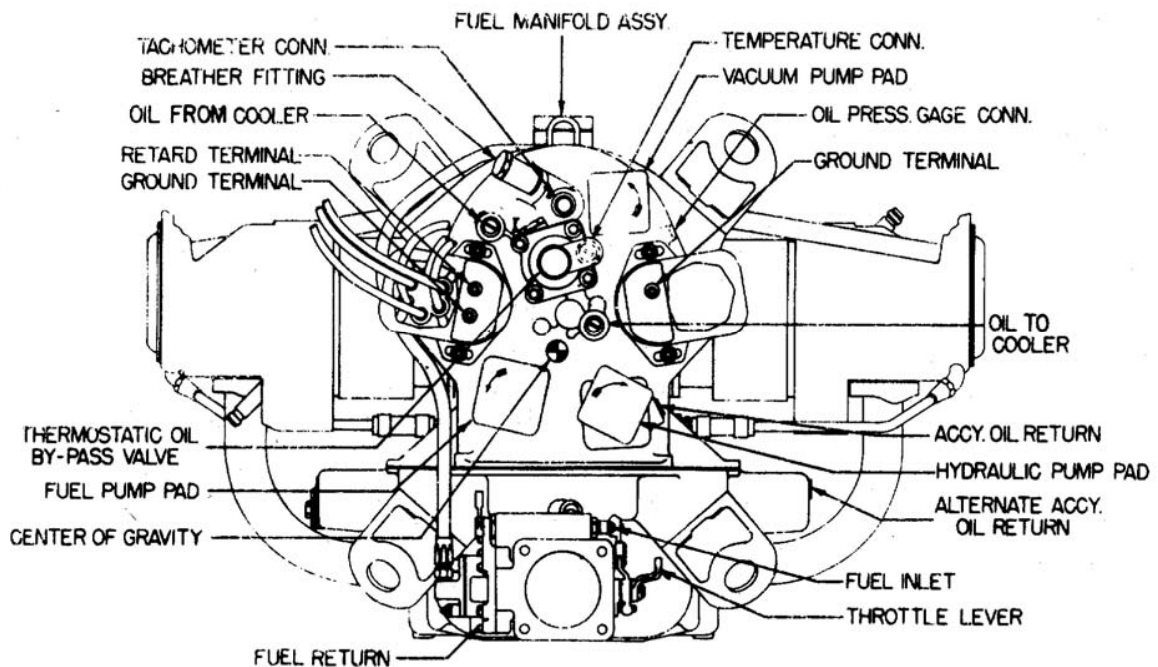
Installation Drawing – Rear View – IO-540-A, -G, -P, -S
